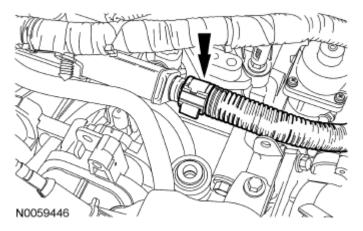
Locating Fuel Supply Tube Quick Connect Coupling Courtesy of FORD MOTOR CO.
